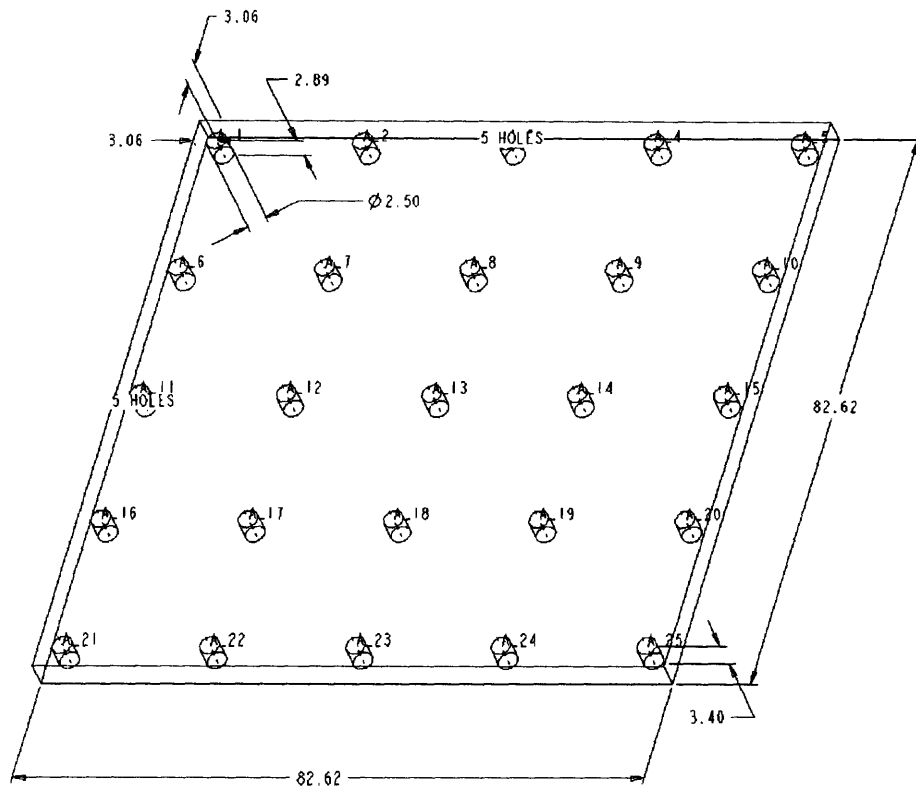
The plate used for warping measurements. All dimensions are given in millimeters
